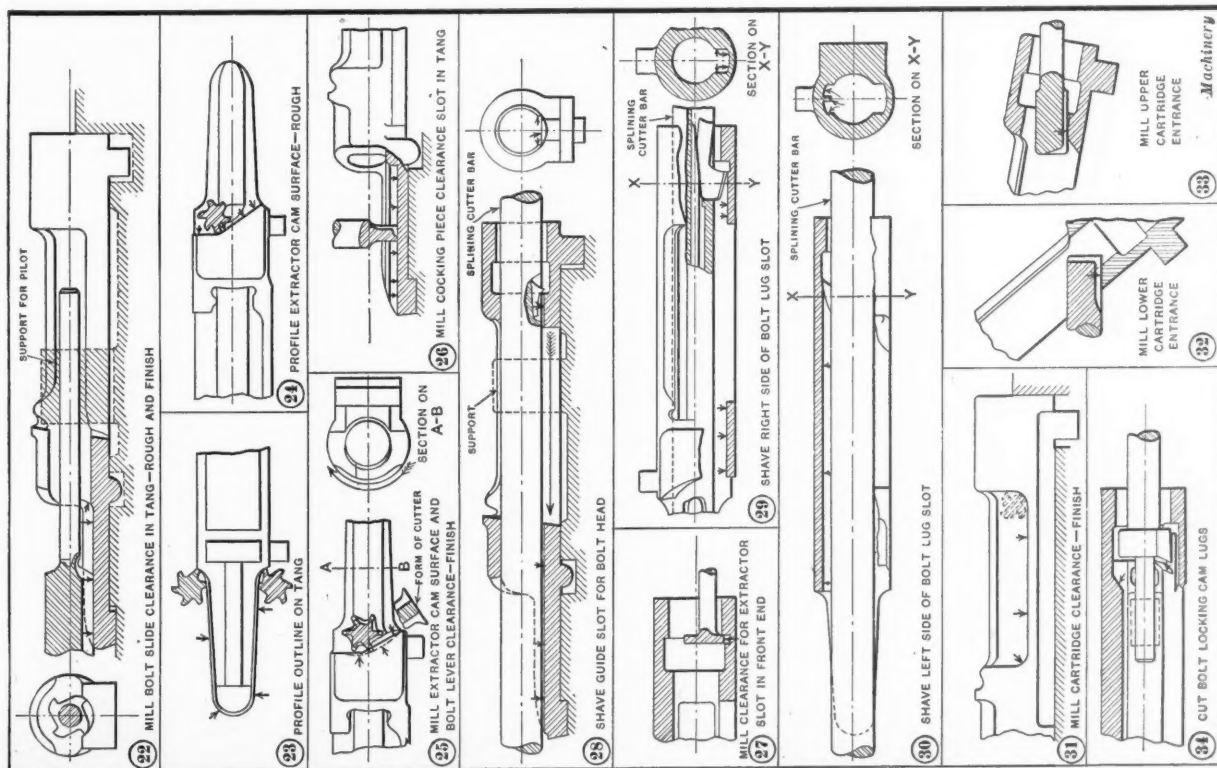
Machining Operations on Spanish Mauser Receiver (Continued)
